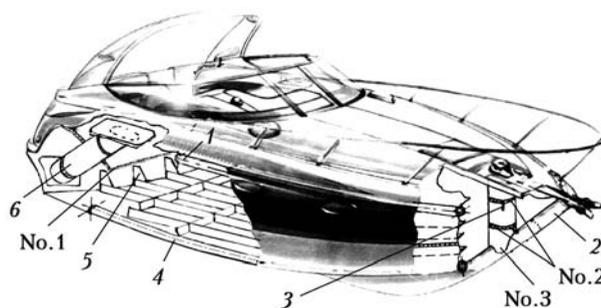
Scheme of welded structure of TC hull of alloy AMg6: 1 – strengthening of deck; 2 – tip tail of keel; 3 – tip support; 4 – bottom strengthening; 5 – knee; 6 – stern support; No.1 – stern strengthening weld; No.2 – support weld; No.3 – weld of support fastening at the stem
